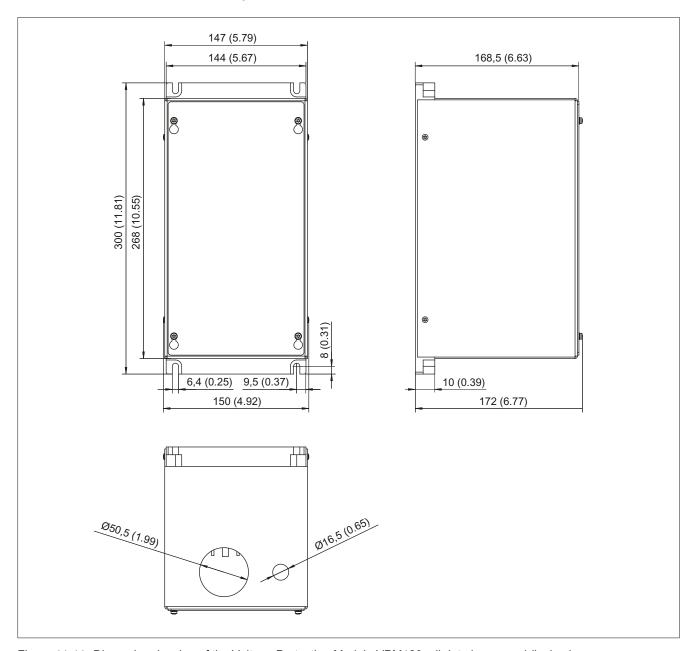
Dimension drawing of the Voltage Protection Module VPM120, all data in mm and (inches)
